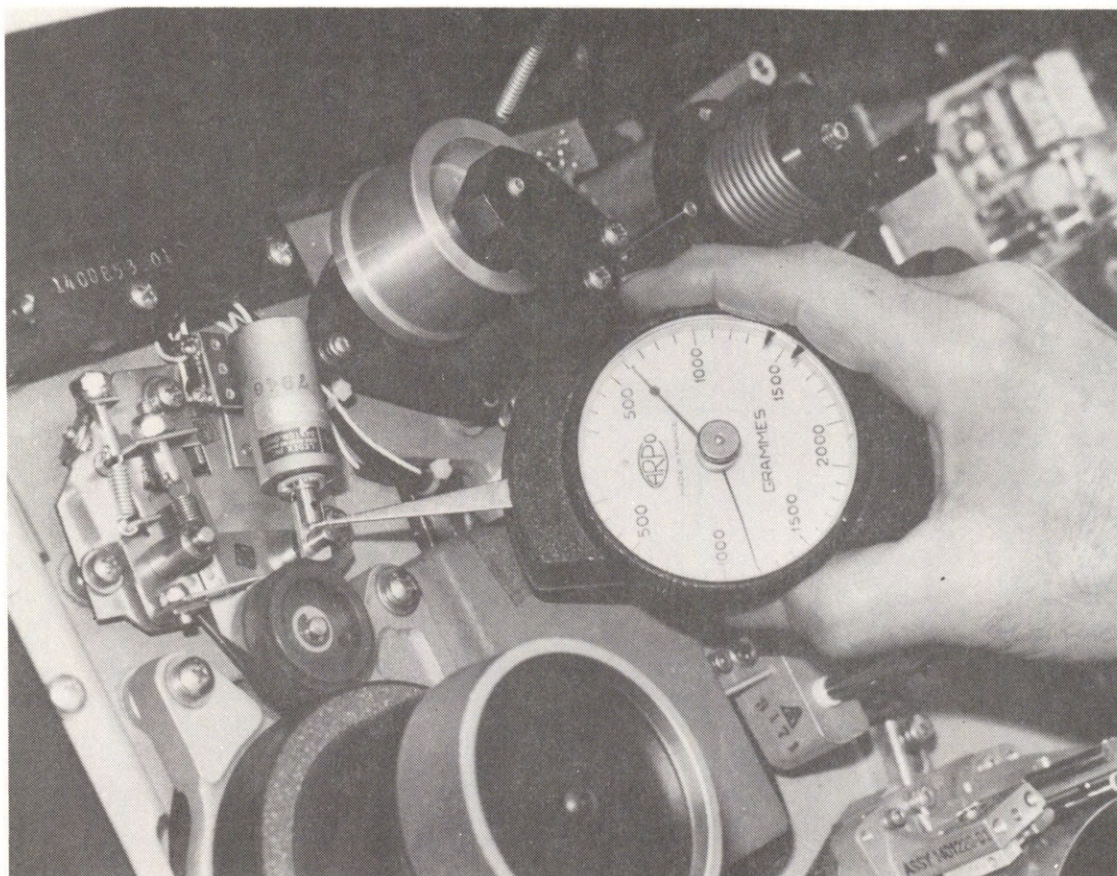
Measure Parking Brake Solenoid Spring Tension
